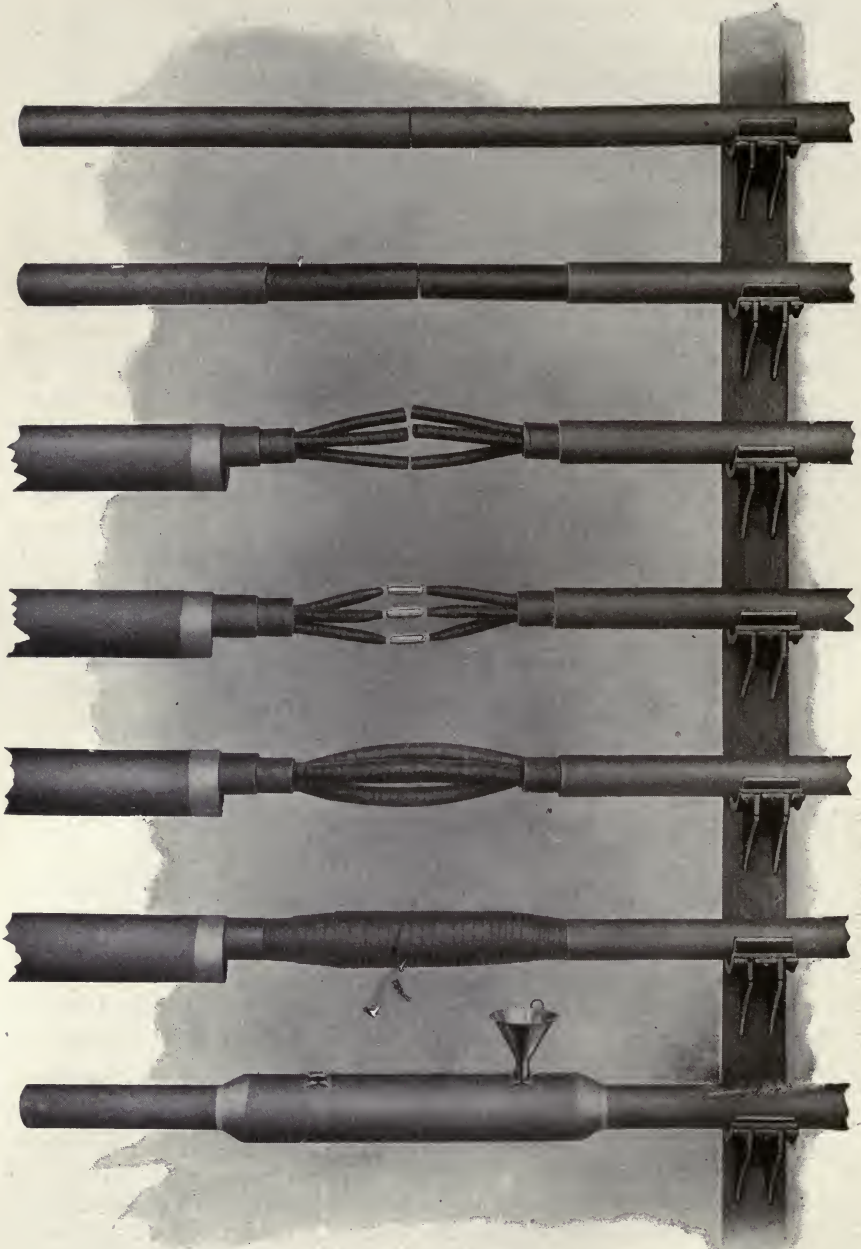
Steps in making three-conductor paper-insulated lead-covered cable joint.
